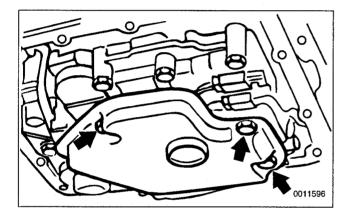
A4S 270R/A4S 310R fluid strainer mounting bolts (arrows).
